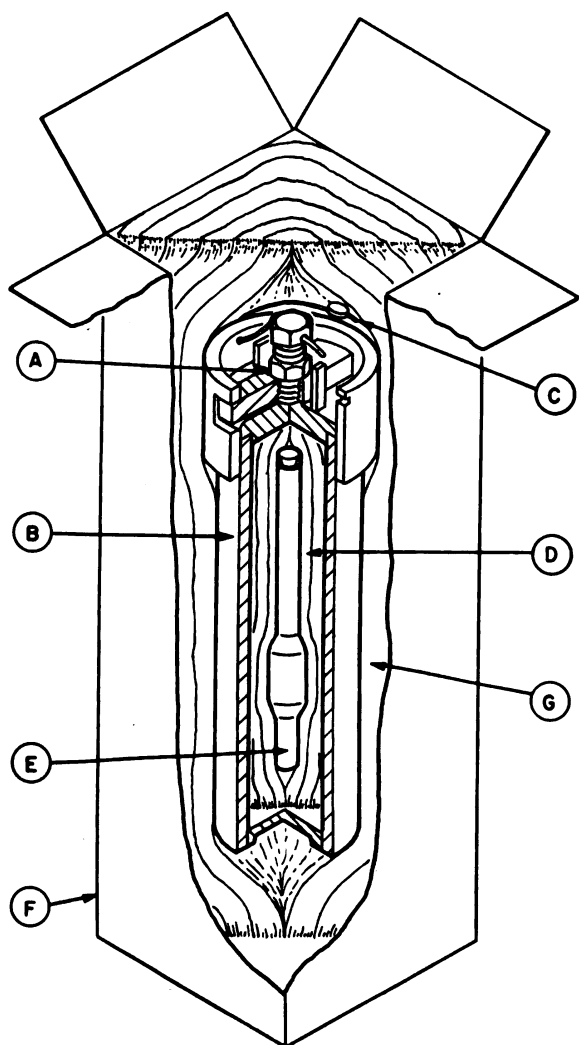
Container for gases. A, locking bolt; B, aluminum container; C, wire and seal; D, paper wadding; E, Pyrex ampoule; F, fiberboard box; G, paper wadding.
